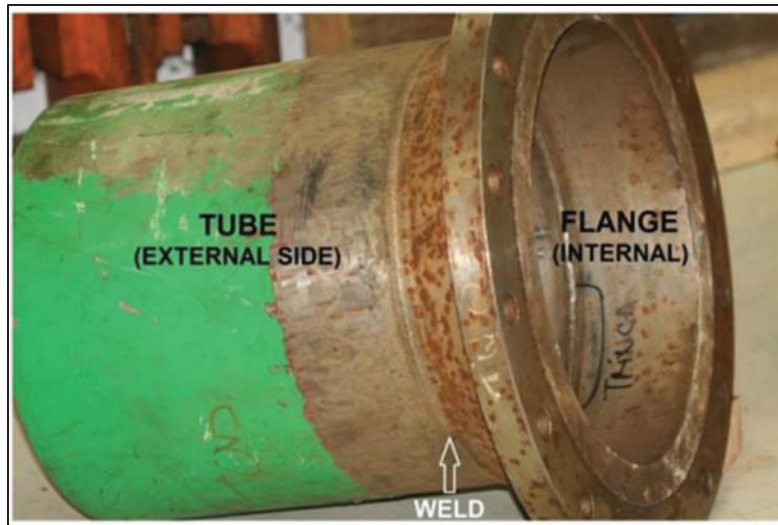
Flange failure due to severe internal pitting corrosion and circumferential crack, visibly marked by a black line on the internal side of the flange
